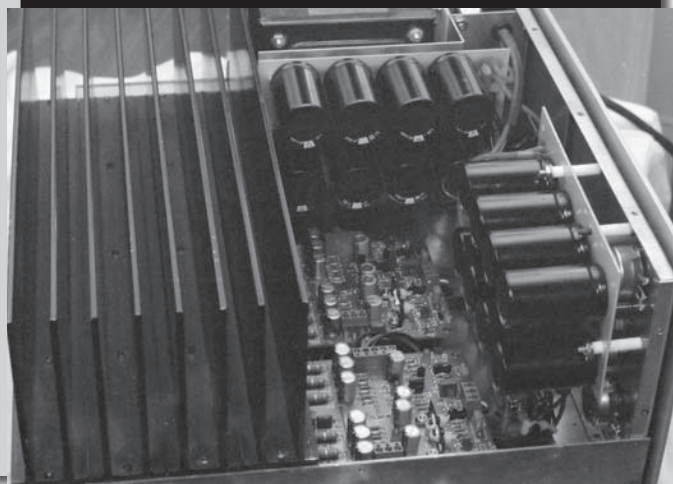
Assembled unit. PCB 3 on the right; PCB 2 at the rear; modules below.
